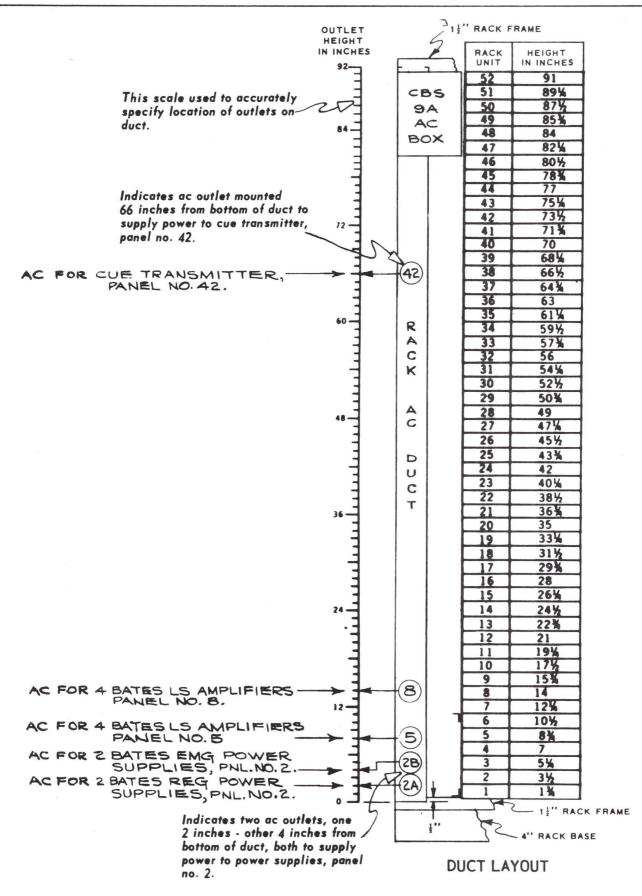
Method of specifying location of ac outlets on rack power duct using Engineering Department Form 17. This example is for the rack shown in Figure 2-2. www.SteamPoweredRadio.Com
